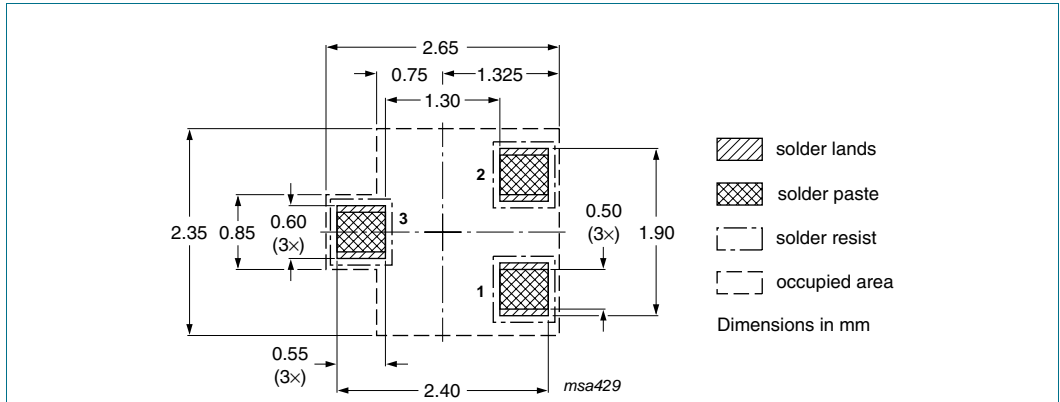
Reflow soldering footprint SOT323 (SC-70)
